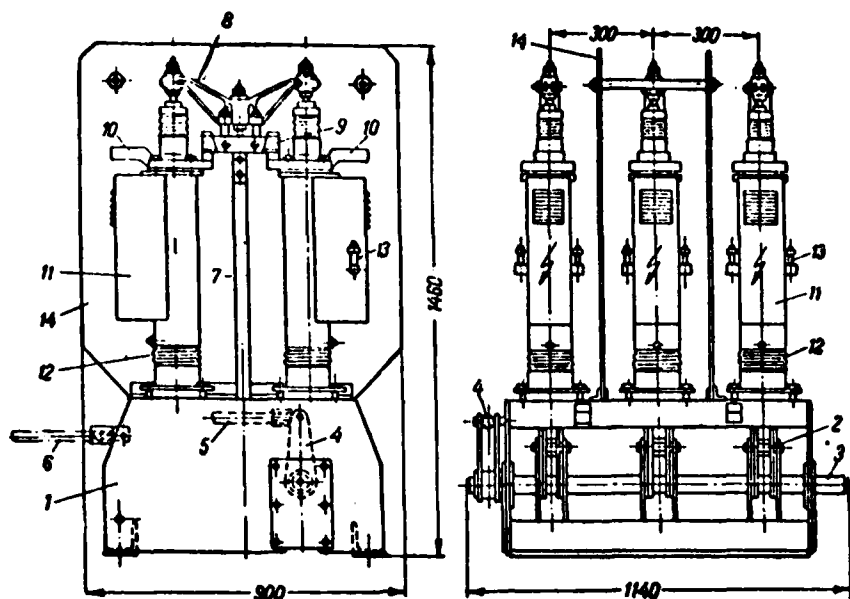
An oil breaker of the type HGG-10 on 10 kV, 2000 A, 500 MVA. 1 - frame; 2 - drive mechanism; 3 - shaft; 4 - lever; 5 - thrust/rod to the drive; 6 - stay rod; 7 - insulating rod; 8 - contact crosshead, which carries the slide contacts; 9 - the make contacts; 10 - terminals/grippers for the connection of the busbars; 11 - tank, 12 - stand-off insulator; 13 - oil gauge; 14 - insulating partition.
